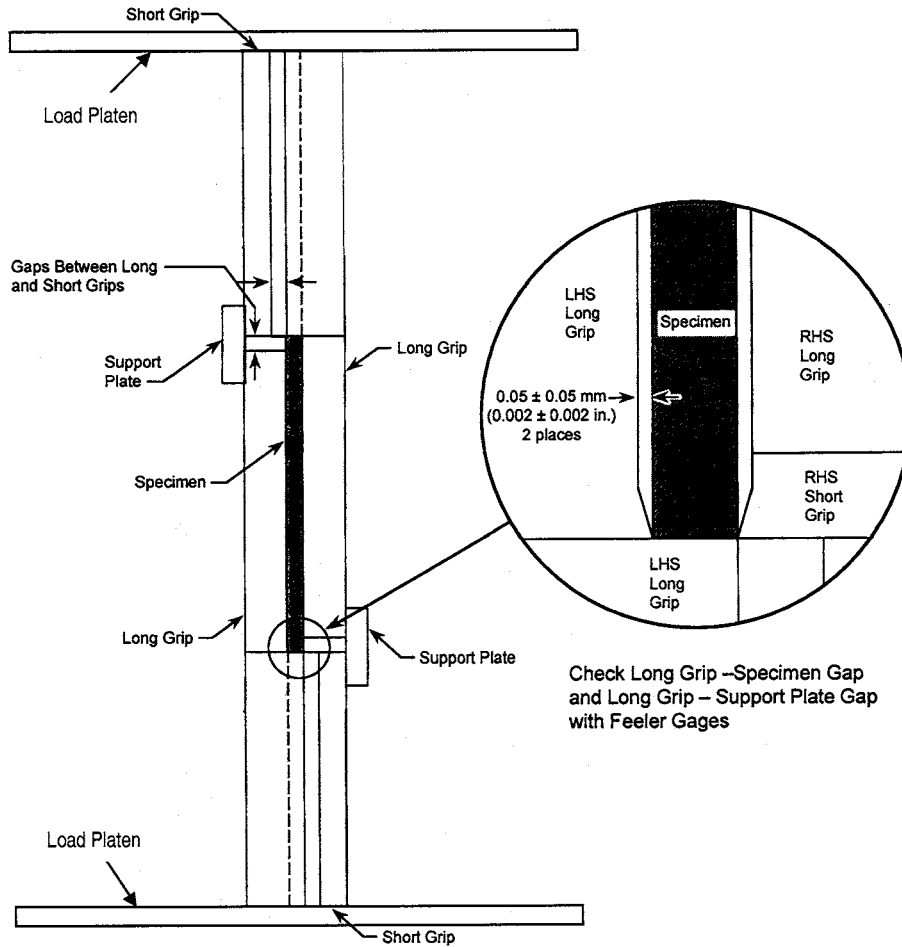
Specimen/Fixture/Grip Assembly, Procedure B (End Loading)
